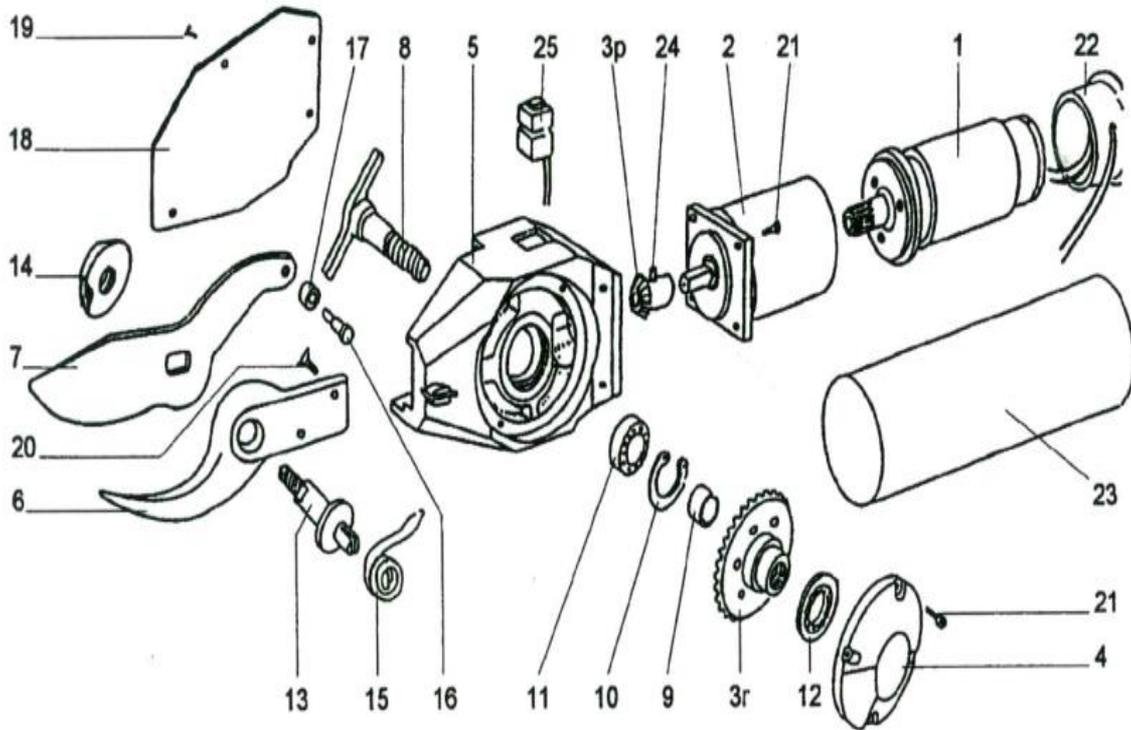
Exploded view of Electrocoupe plus electric pruning shears
